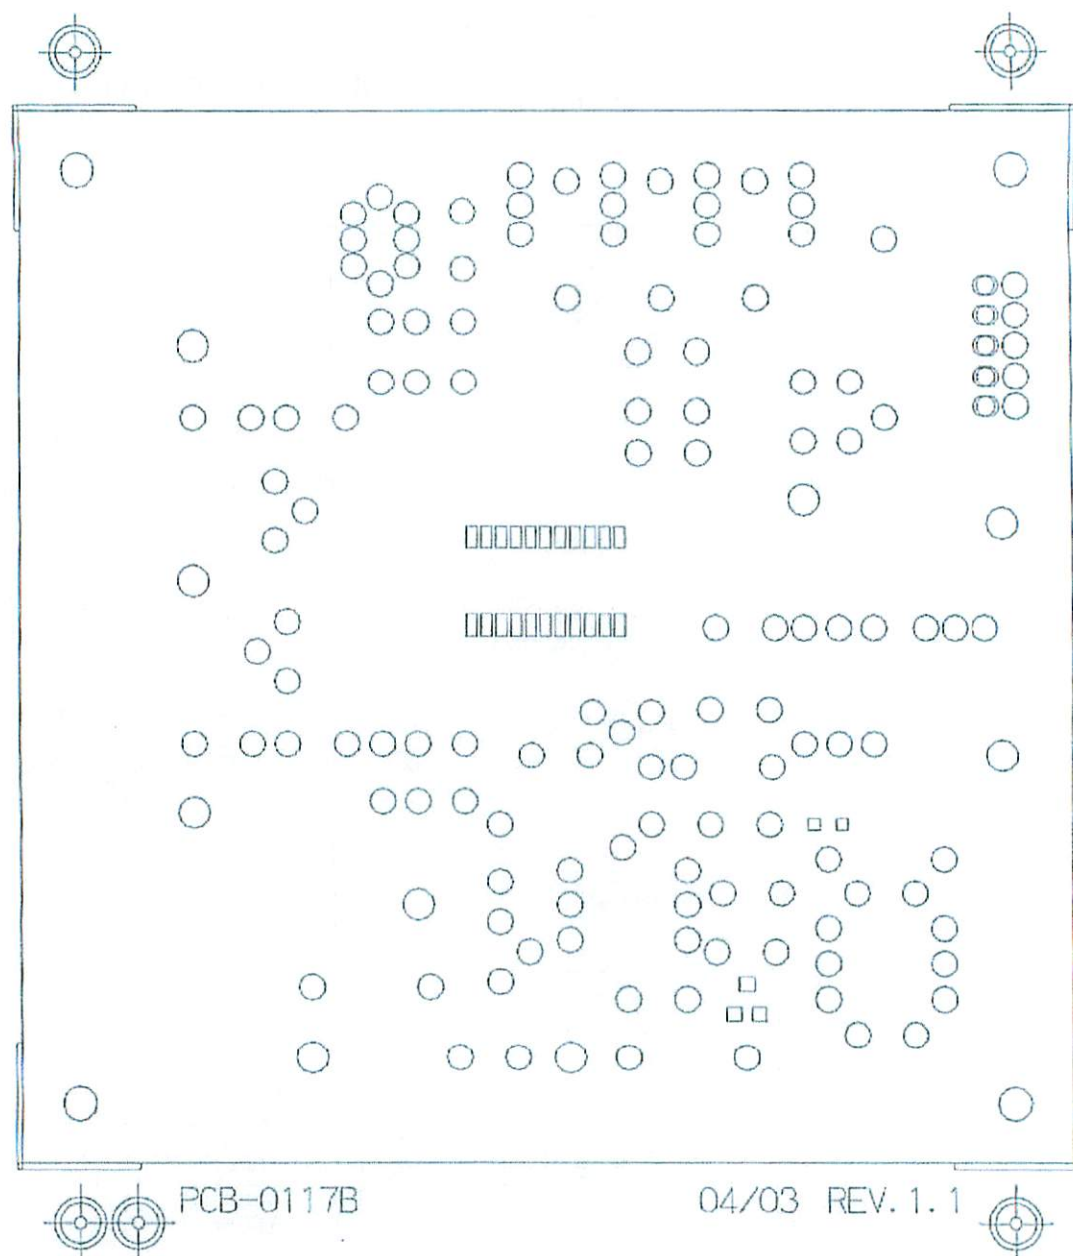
Evaluation board, Soldered surface resist (as viewed from soldered surface)
